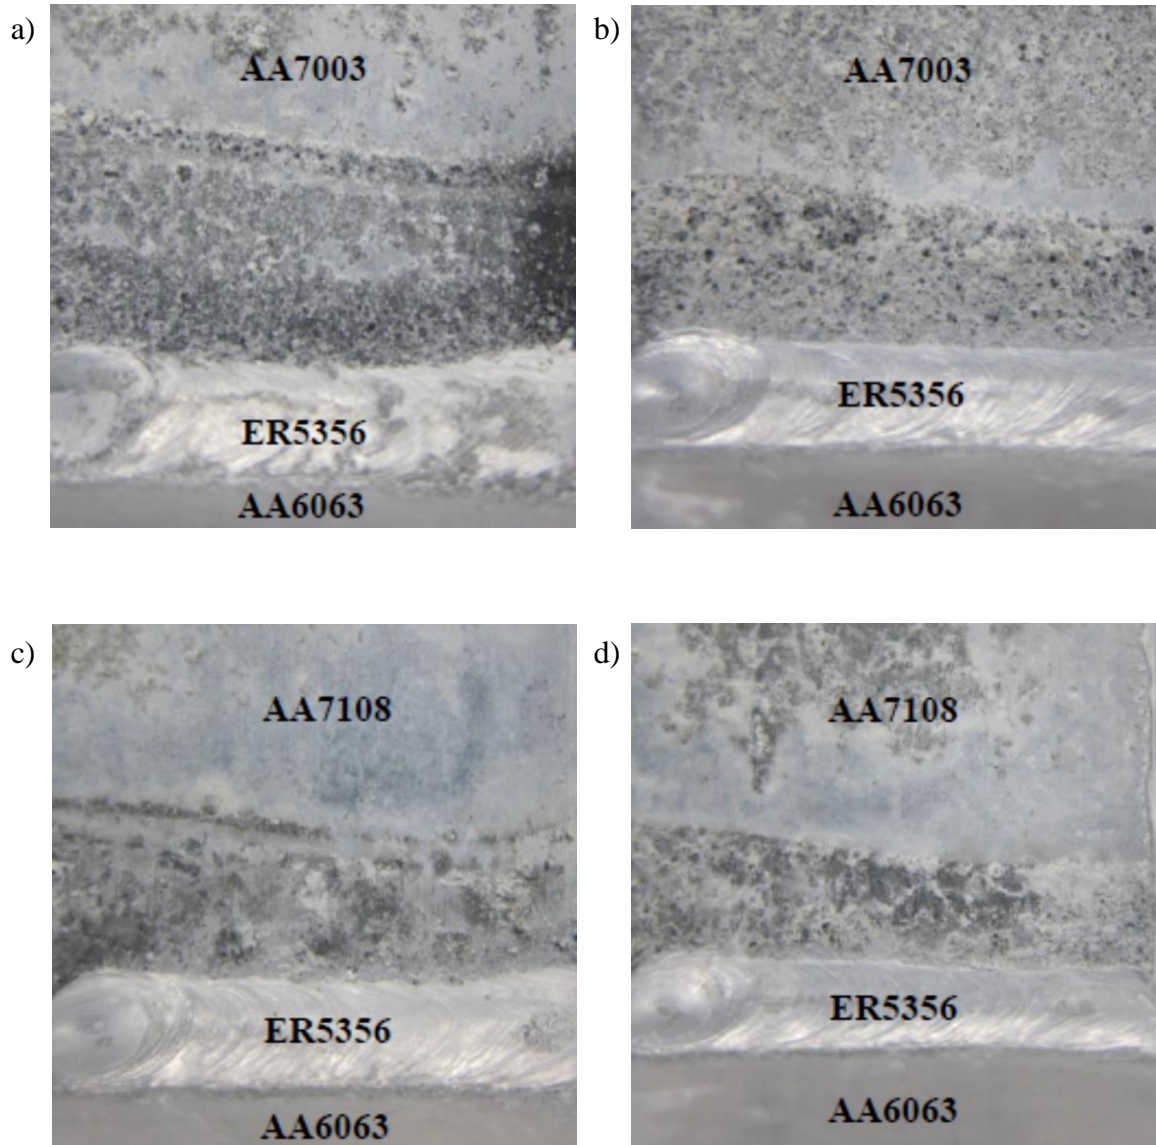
Photographs of T-joint welded AA7003 (configurations E1 and E3) in (a) as-welded T6 condition, (b) as-welded T6+PB condition and T-joint welded AA7108 (configurations F1 and F3) in (c) as-welded T6 condition, (d) as-welded T6+PB condition exposed to ASTM G85-A2
